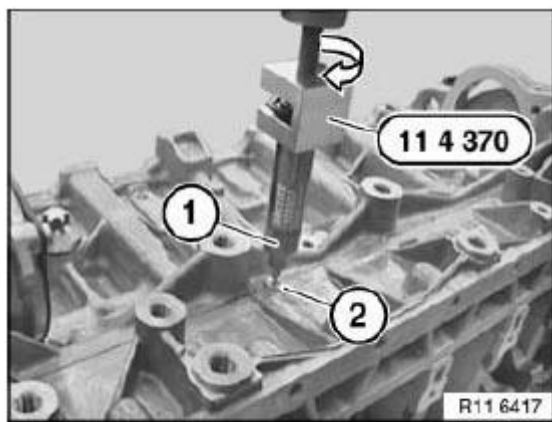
Inserting Liquid Sealing Compound Using Special Tool 11 4 370
